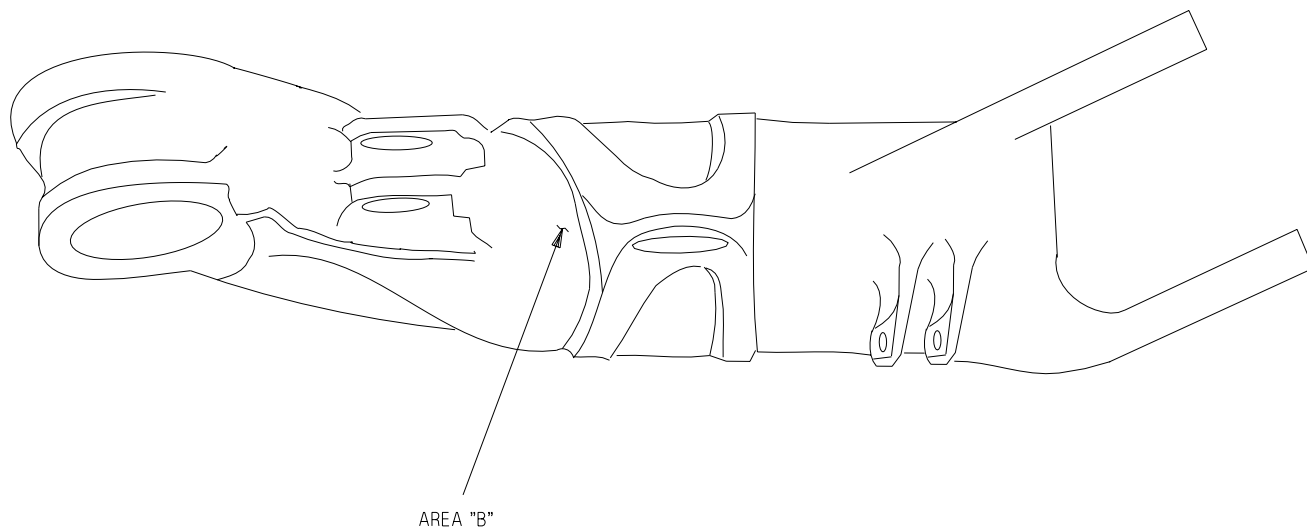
L/H Main Landing Gear Lever P/N 74A410506 Inspection Locations (Sheet 1)
